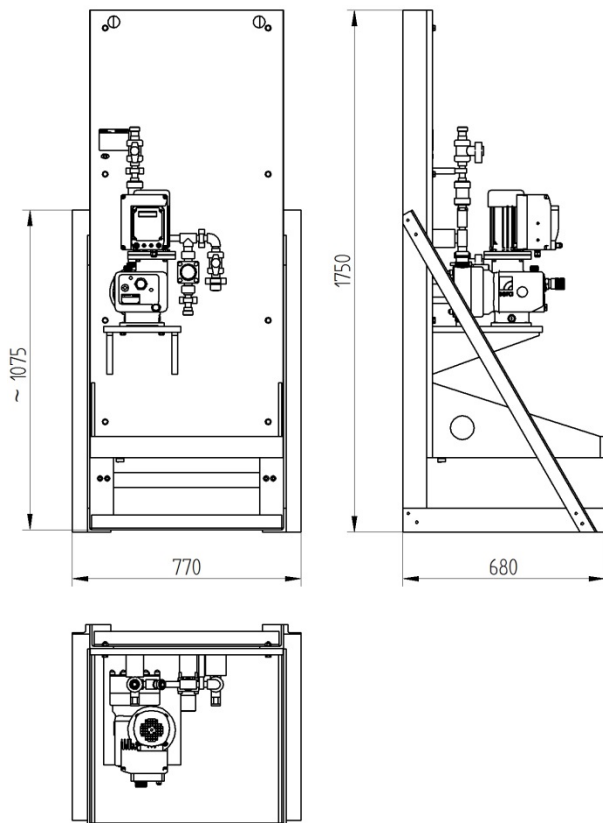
Dimensions of the CVD1 (floor mounting, GFK stand)
